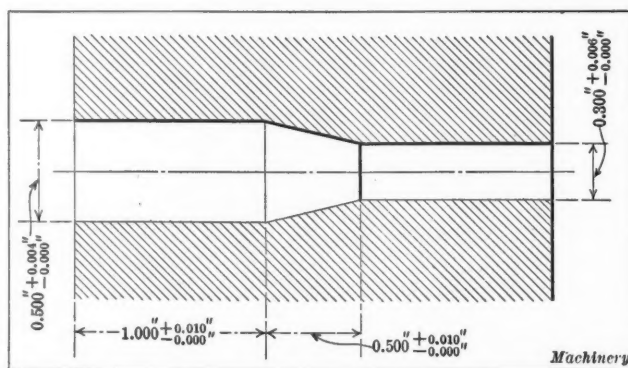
Incorrect Method of dimensioning Tapered Hole
